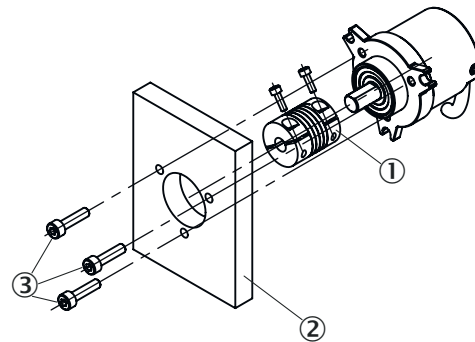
Installing face mount flange 3xM3 via the flange-side threaded holes
